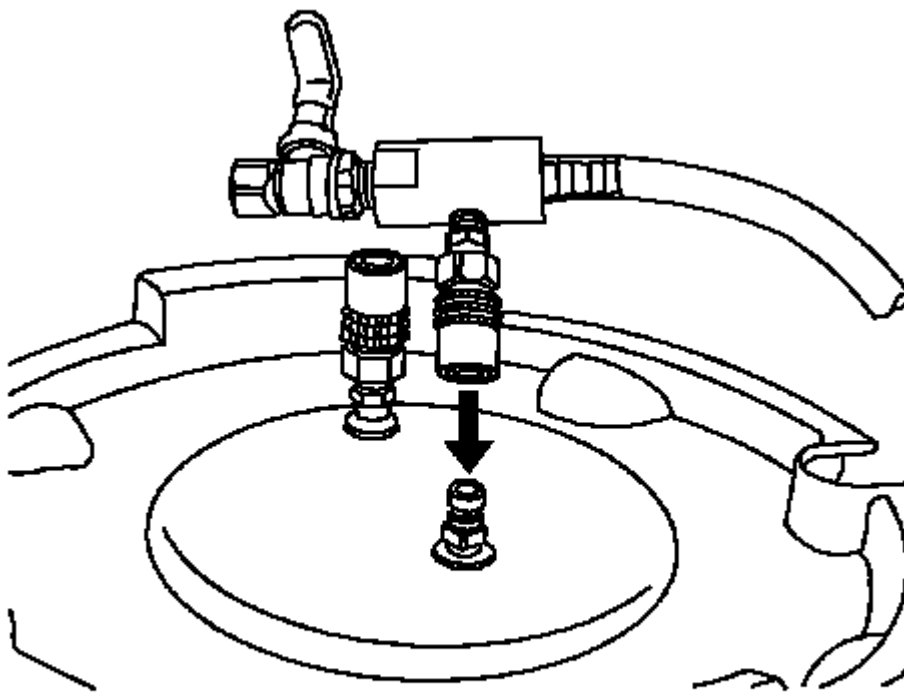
View Of Venturi Assembly & Vacuum Tank
